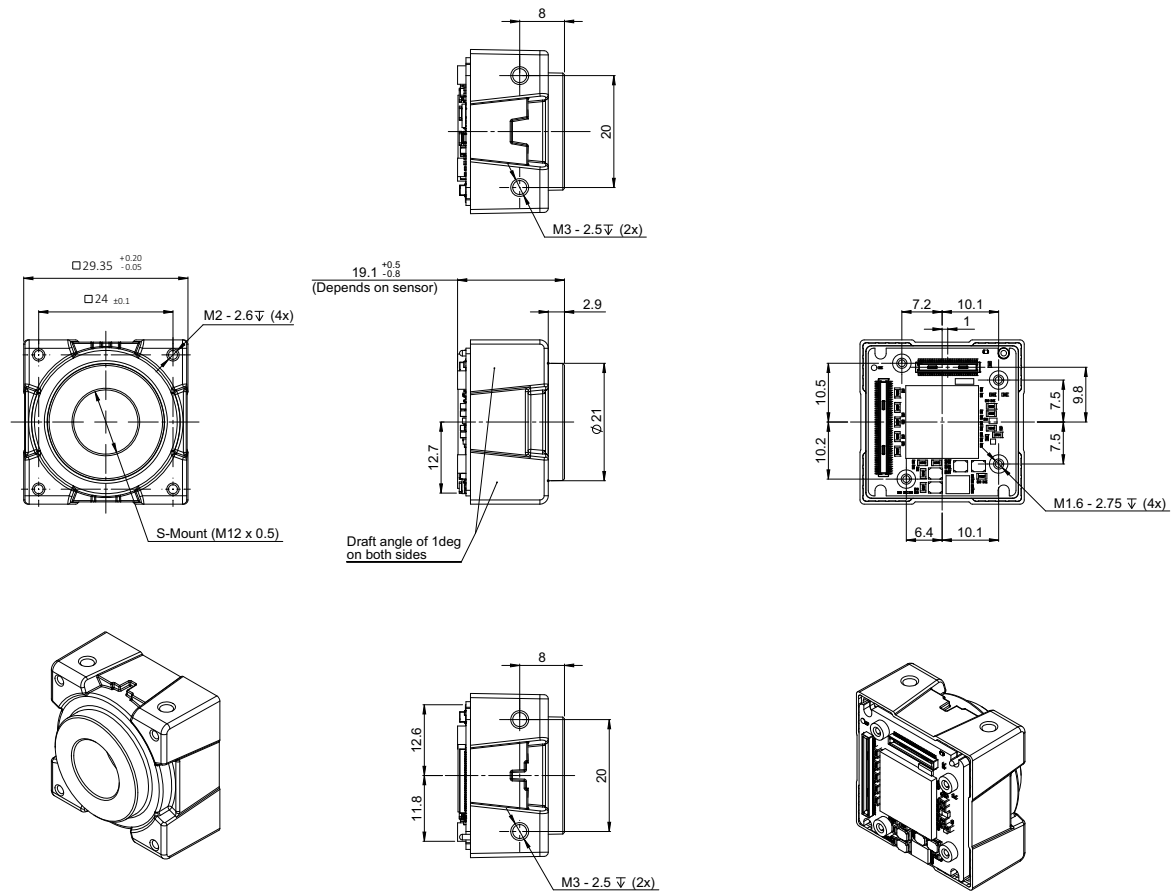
Open Housing S-Mount (Alvium Flex) dimensions
